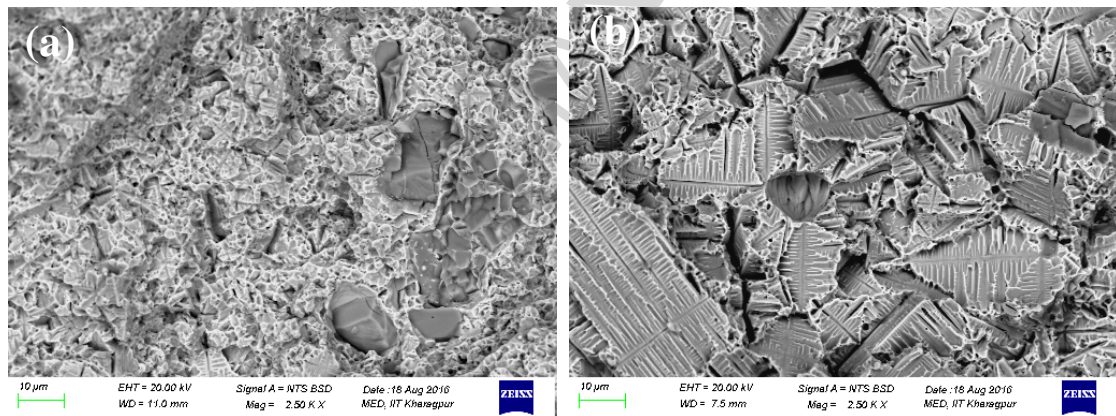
Fracture surface of samples clad at 1200 W laser power and (a) 1200 mm/min and (b) 400 mm/min scan speed
